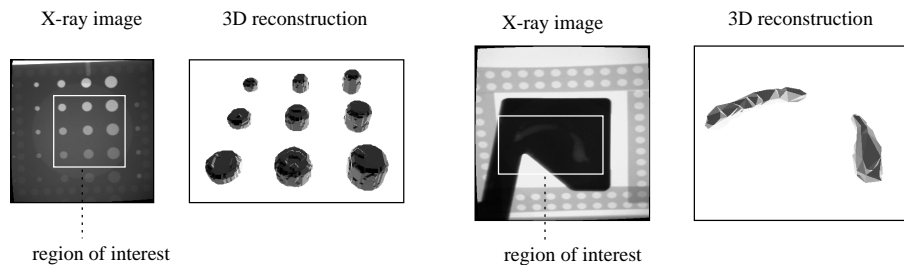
Reconstruction of drilling holes and casting defects
